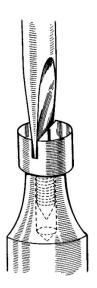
B – Showing Method of Cutting Recess in Balance Screw
